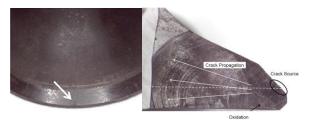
Crack location and typical macroscopic fracture morphology of the surfacing layer<sup>[3]</sup>
